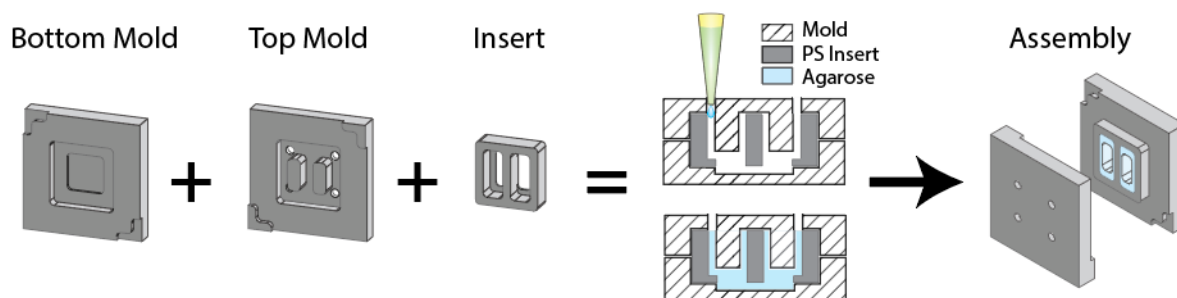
Stamp Molding* – Stamp molds consist of three parts (bottom, top, and insert). When assembled the mold can be filled from one of four vents on the top mold. Agarose is allowed to cool and cure fully before removal of the molded stamp (agarose + insert).
